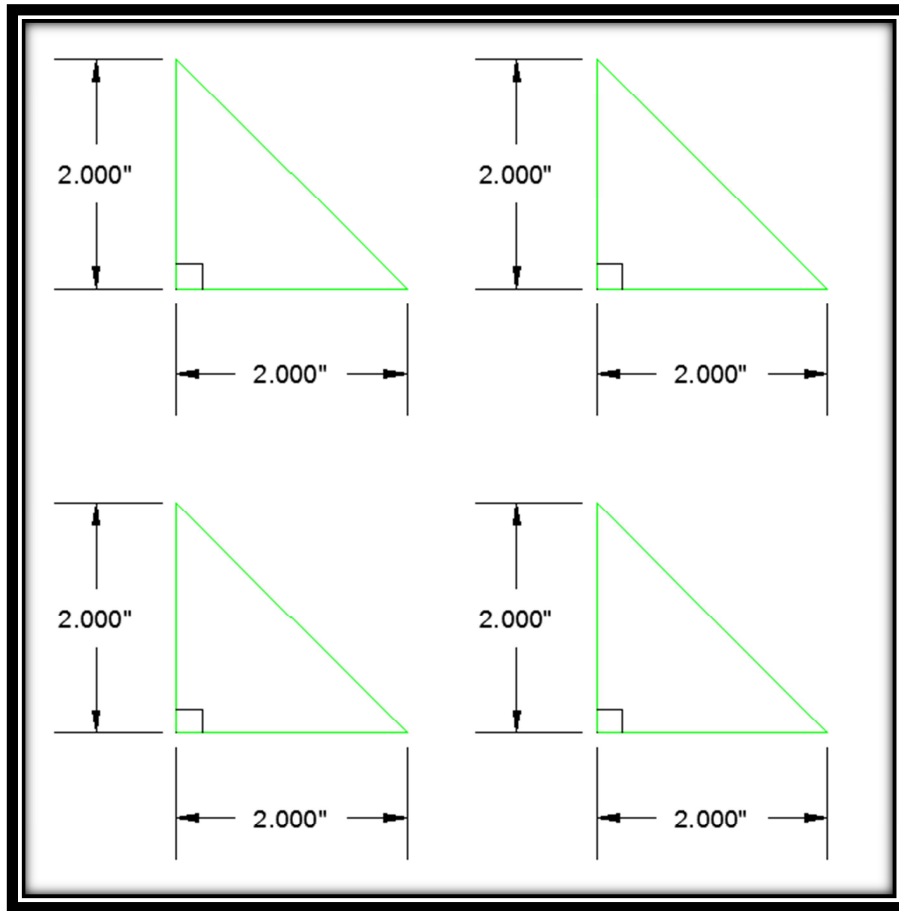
Axle Holding System – Angled Side Pieces Dimensions
